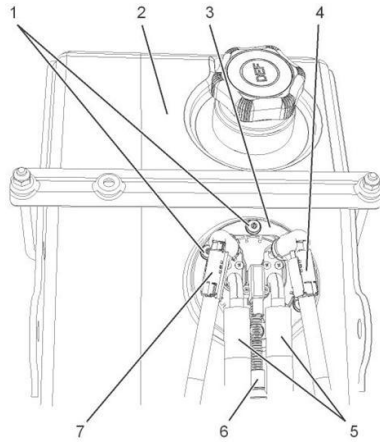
Diesel Exhaust Fluid (DEF) Tank Pickup Assembly
